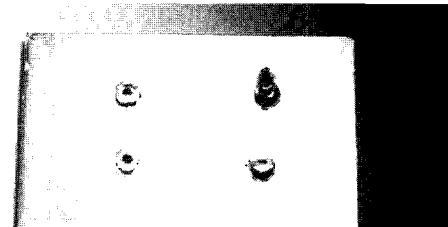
Fracture appearance for 4 points Rivet joint
